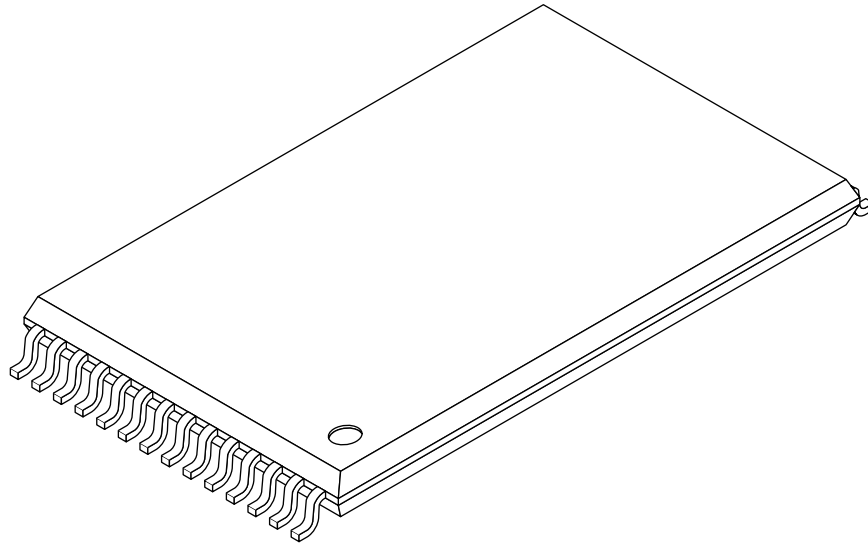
28-Pin (8 x 13.4 mm) TSOP (Type I) Package Dimensions
